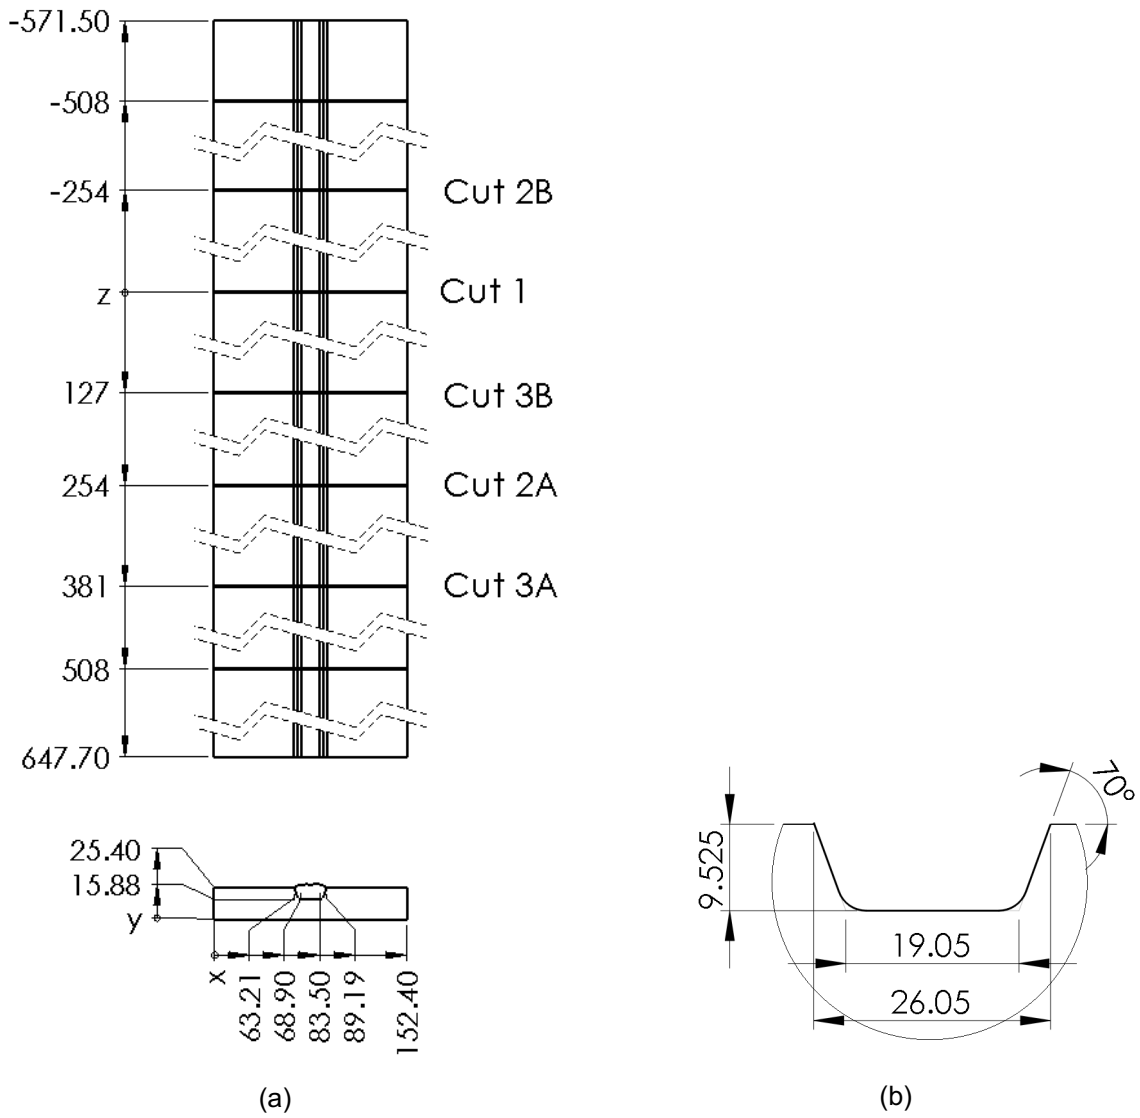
Stainless steel dissimilar metal welded plate (a) dimensions and measurement locations and (b) slot details (dimensions in mm)
